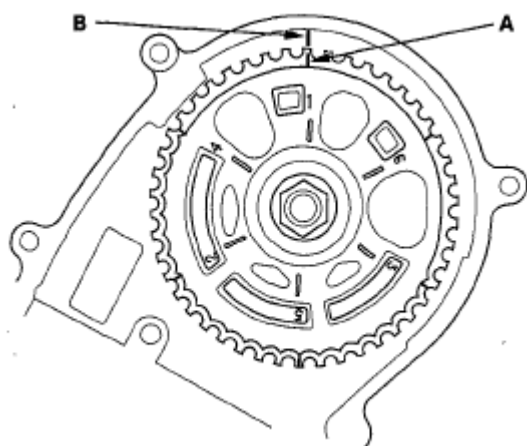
Aligning TDC Marks On Camshaft Pulleys - Front
